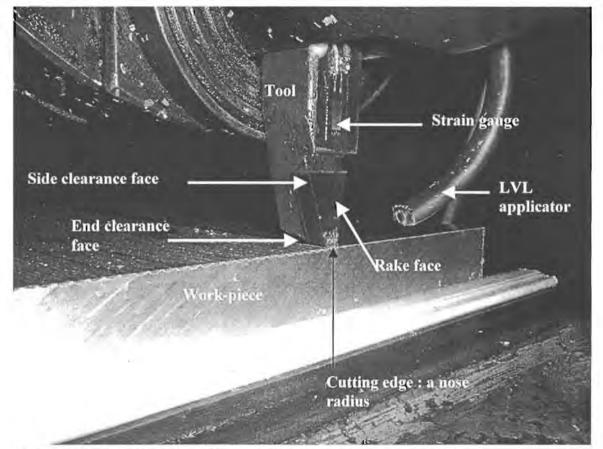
View of the tungsten carbide cutting tool in the shaper
